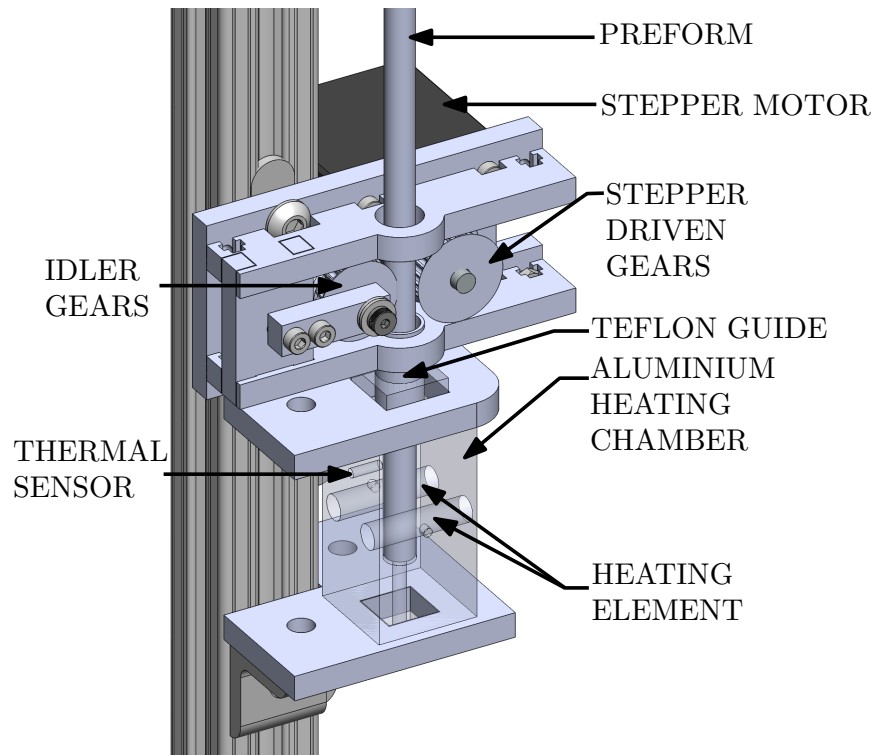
The Extruder System Composed of Feeder and Heating Chamber
